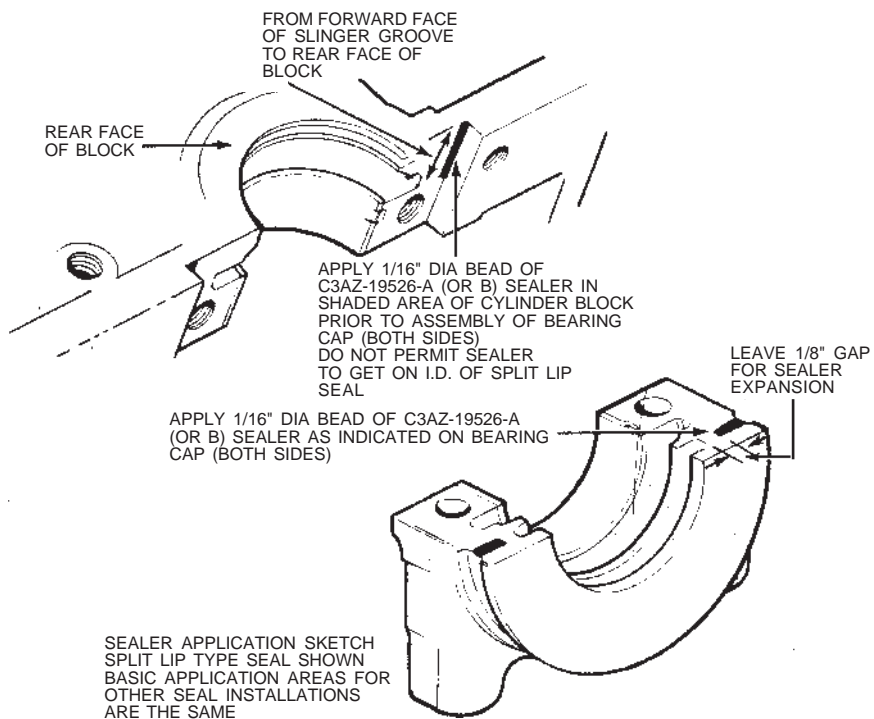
Applying RTV Sealer To Main Bearing Cop and Block
